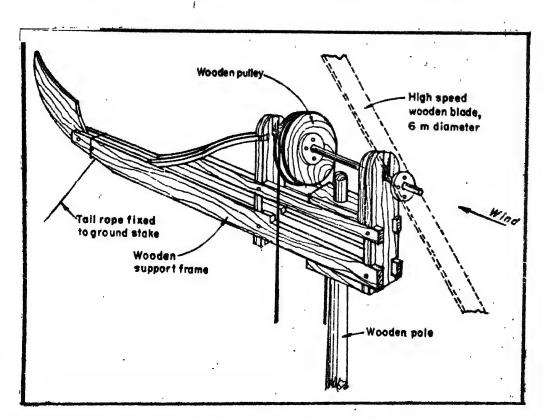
Thai high speed rotor water pumpwooden mounting assembly
